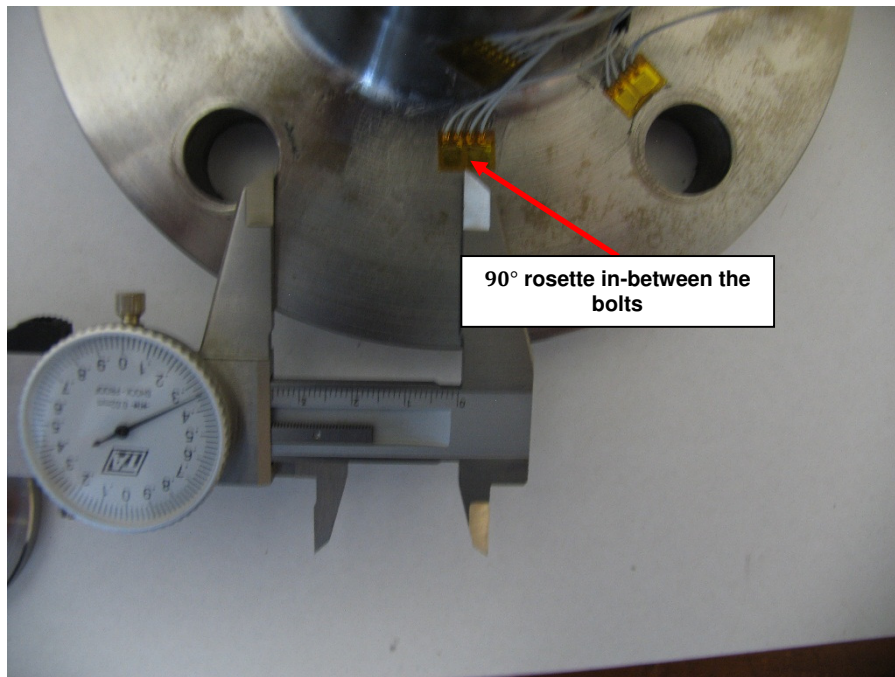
Position, with the perpendicular distance from the edge of the bolt hole, of the 90° rosette in-between the bolts on the ring of the flat face flange
